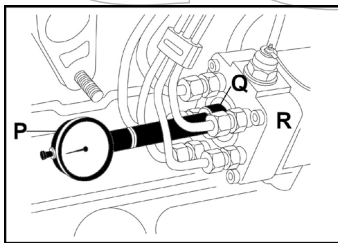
Screw comparator P using adapter Q on high pressure pump R.
